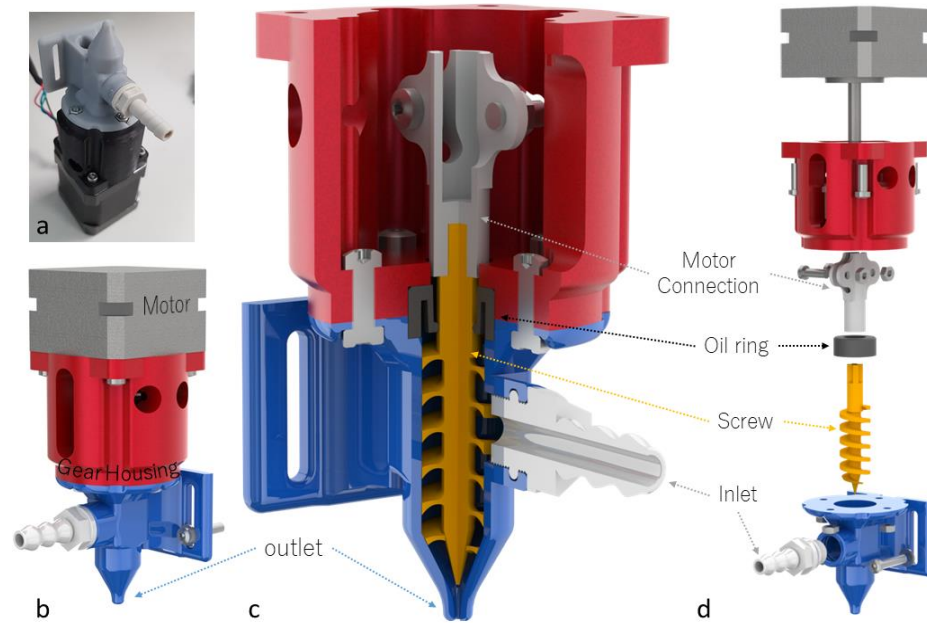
a) Fully assembled SDS. b) Assembly CAD design. c) Cross-sectional view of the subsystem. d) Exploded view of the subsystem.
